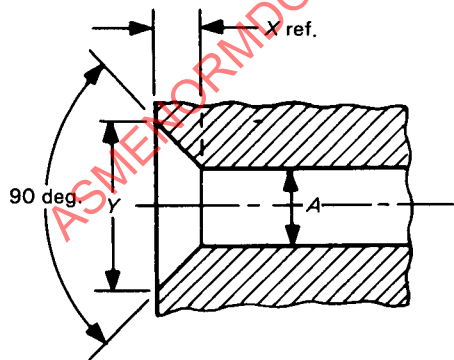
HOLE AND COUNTERSINK SIZES FOR FLAT COUNTERSUNK HEAD CAP SCREWS
